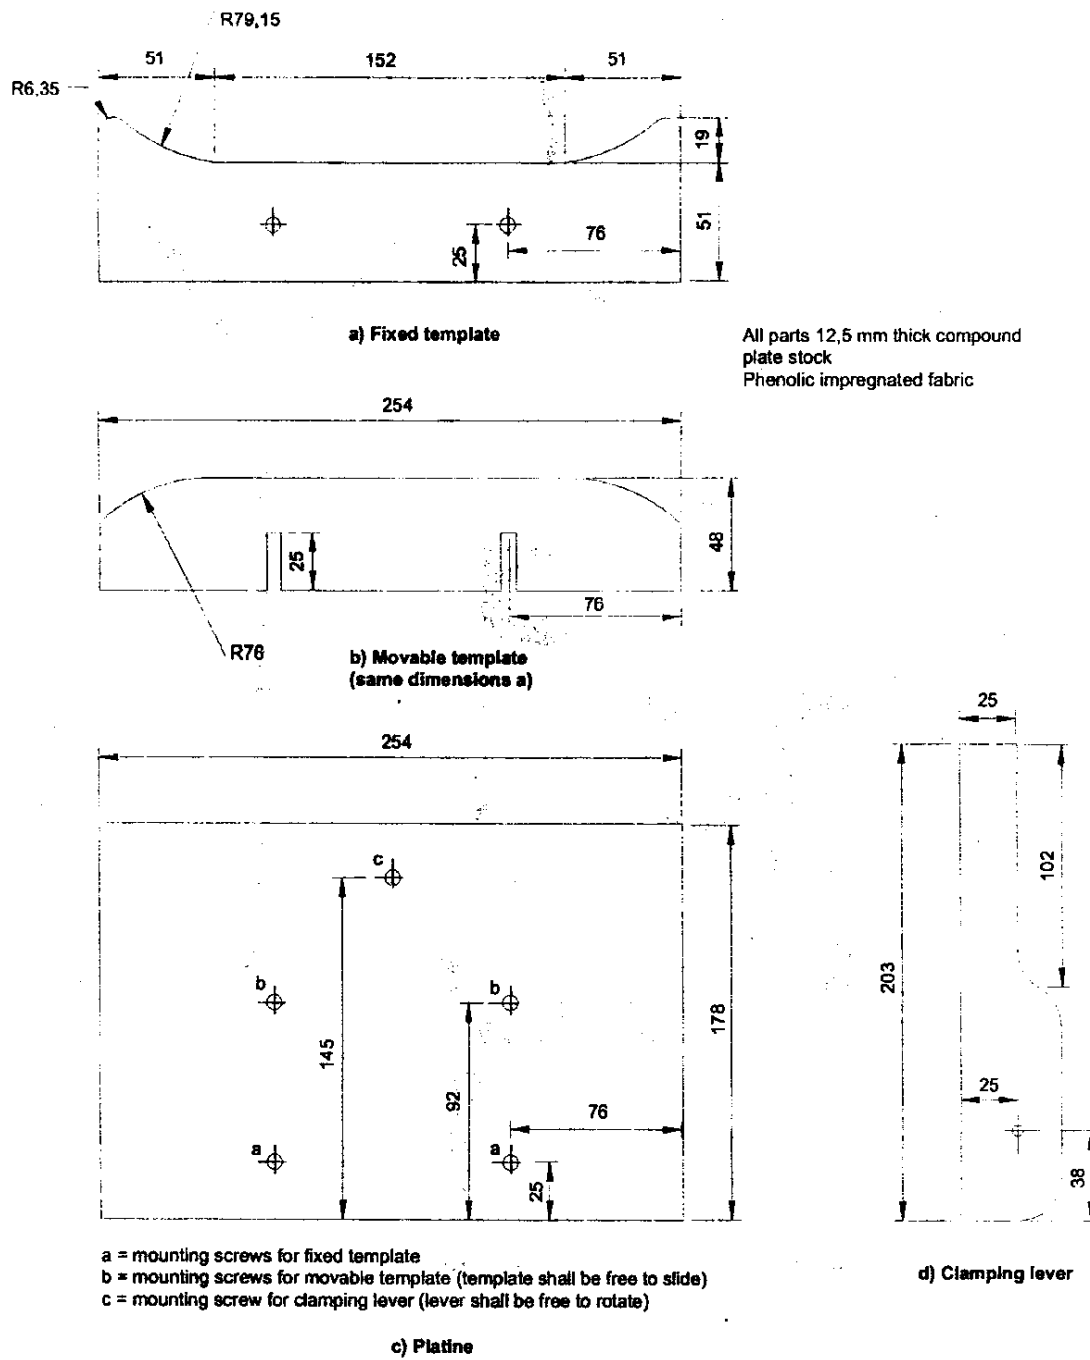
Jig for bending large magnet wire, dielectric test specimen
